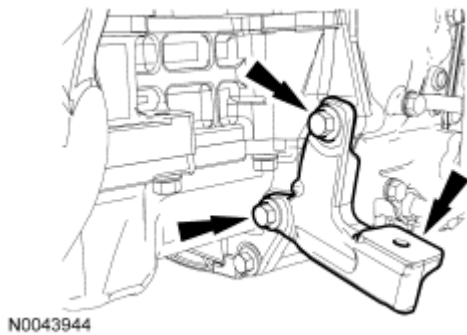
Locating Front Catalytic Converter Bracket Bolts
